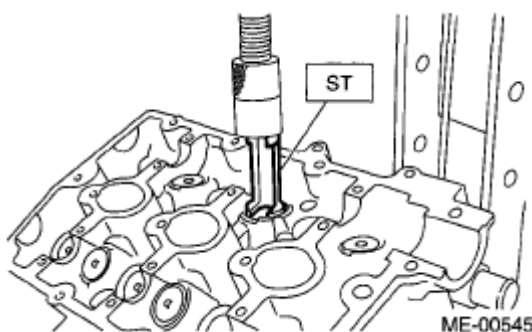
Identifying Intake Valve Oil Seals And Exhaust Valve Oil Seals
